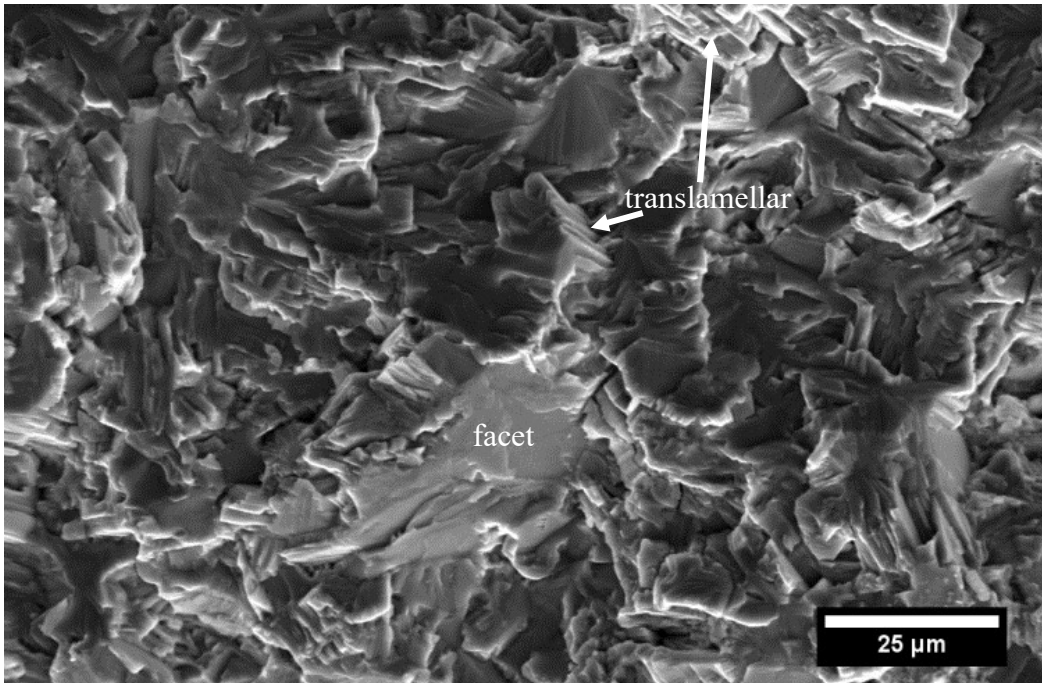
Representative fatigue crack SEM-SE fractography of sidepress-forged fatigue fracture features in the high  $\Delta K$  regime at  $R = 0.1$ . Crack direction is from top to bottom.
